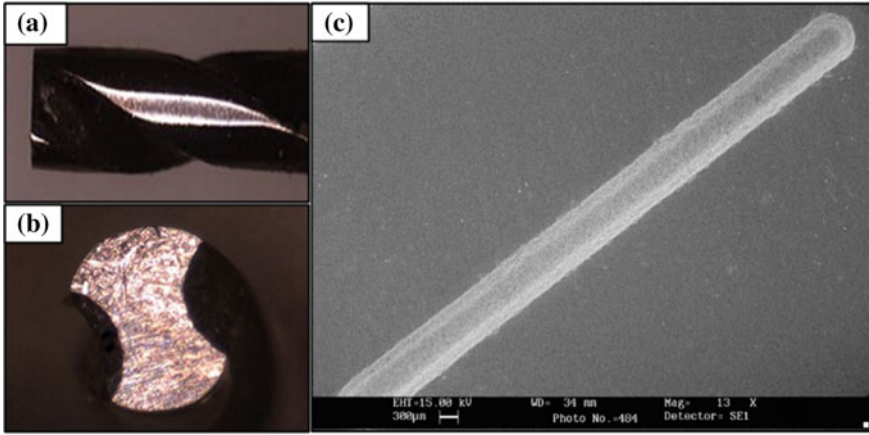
a, b Front and top view of tool, c SEM image of machined micro-channel
